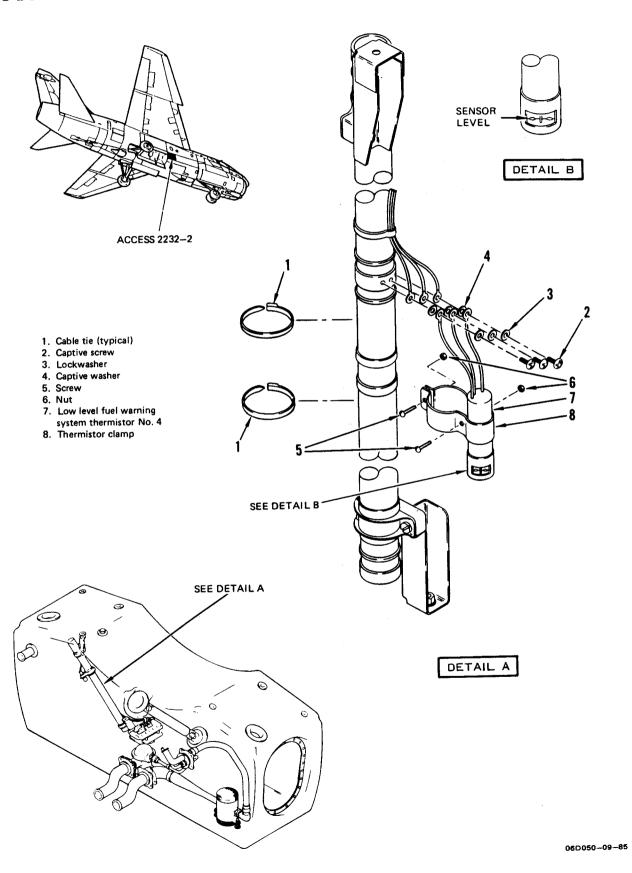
Removal and Installation; Low Level Fuel Warning System Thermistor No. 4
